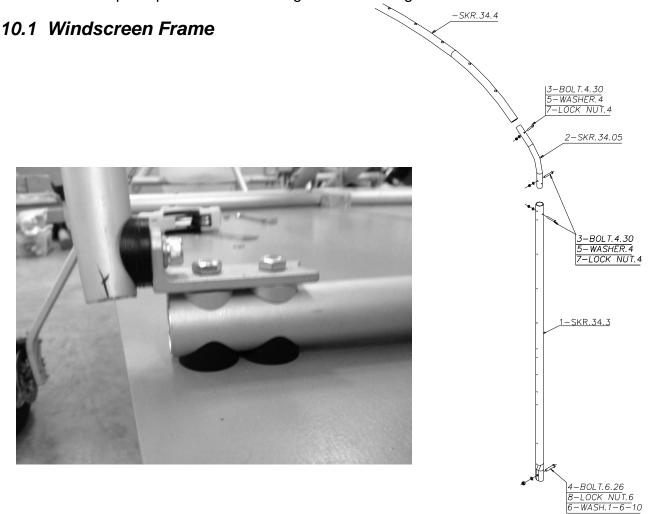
cabin uprights (note that saddle washer shown has been superseded by flattened tube sides and 1mm plastic washer should then be used).
